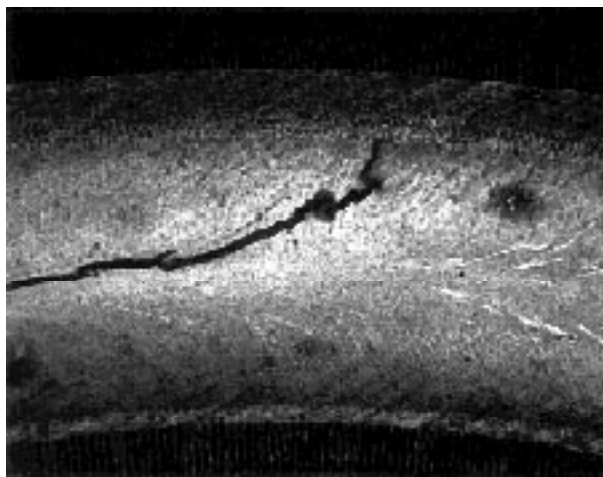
Solidification in weld cracking specimen in 6061. Note how crack initiates at outer edge of the fusion zone. Weld travels from right to left.
